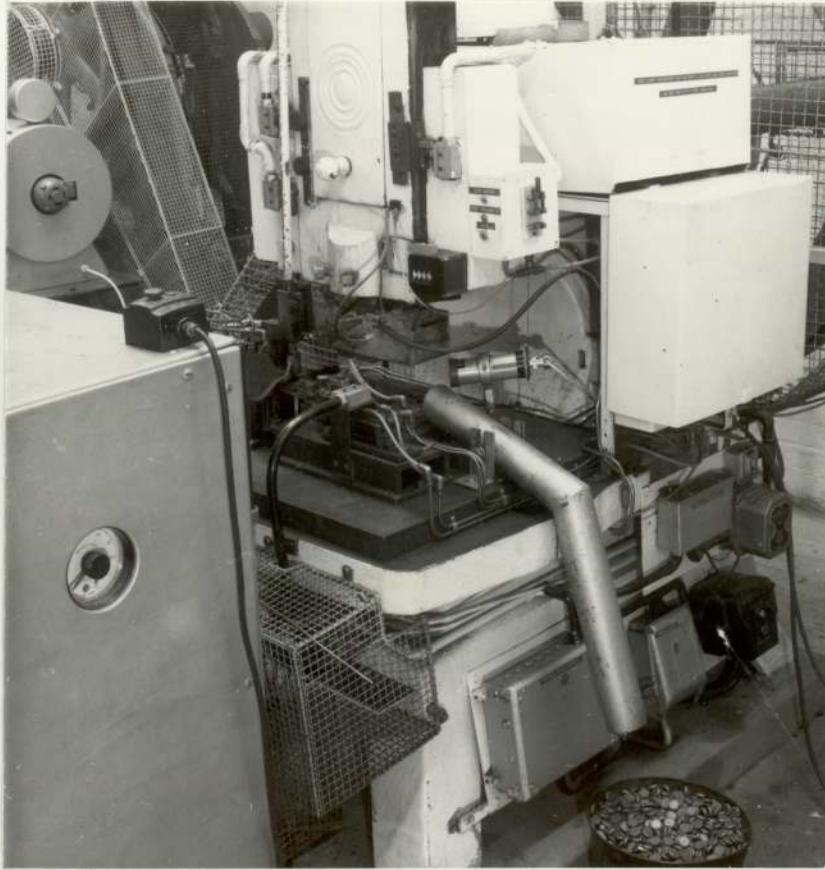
A general view of the forging equipment showing the forging operation arrangement
